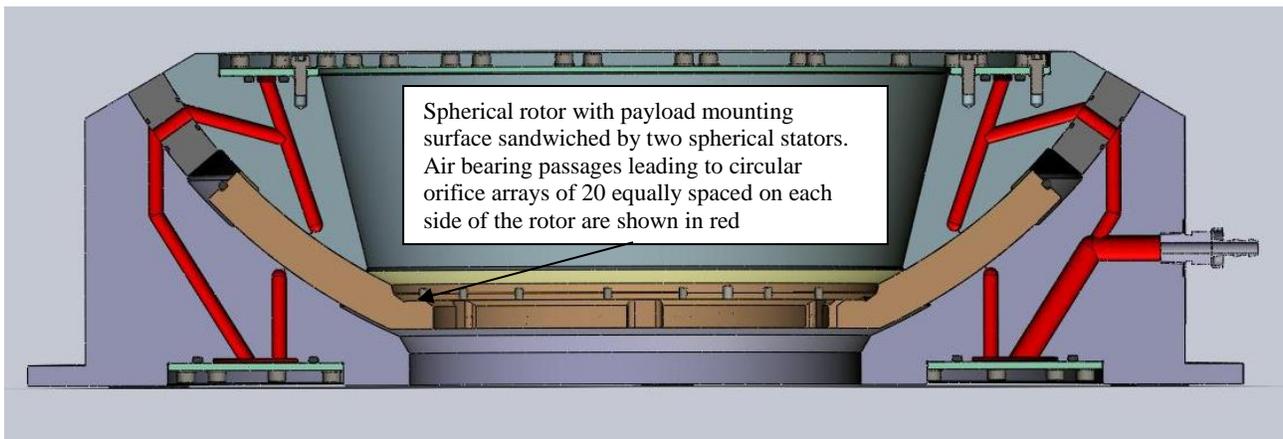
Many configurations of spherical gas bearing gimbal designs have been developed. The above figure illustrates the cross sectional view of a large spherical air bearing gimbal developed as a part of a simulation system. The system provides virtually frictionless motion in three axes and a large load capacity.
